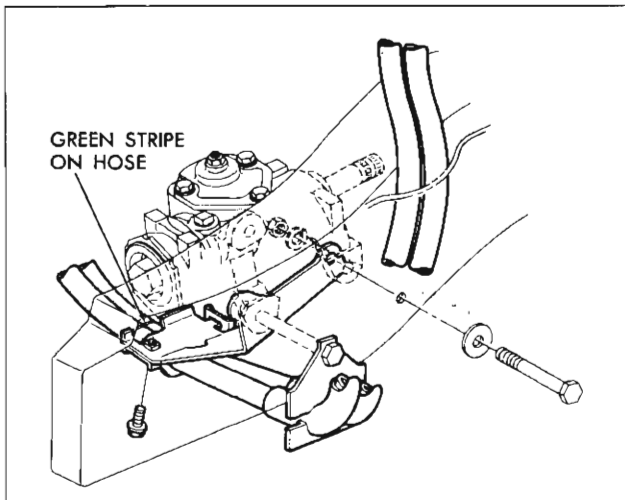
Power Steering Hose Routing to Hydraulic Pump
